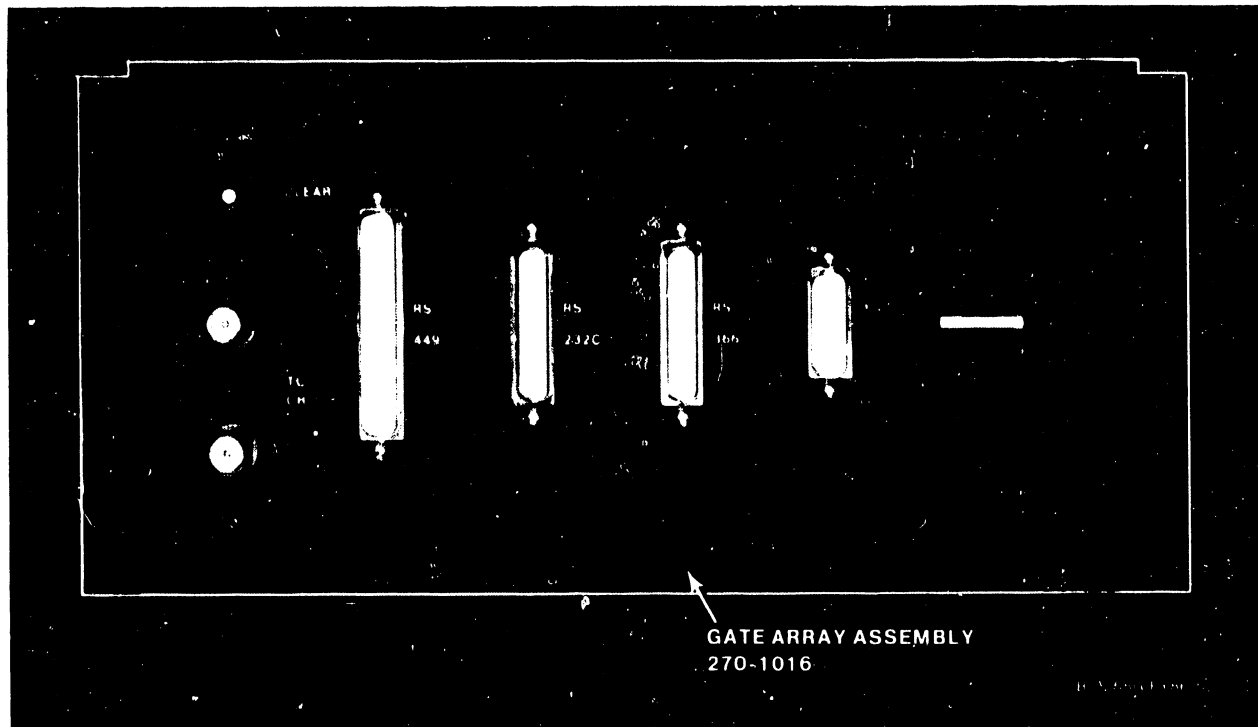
VS-300 Gate Array TC Back Panel Assembly
